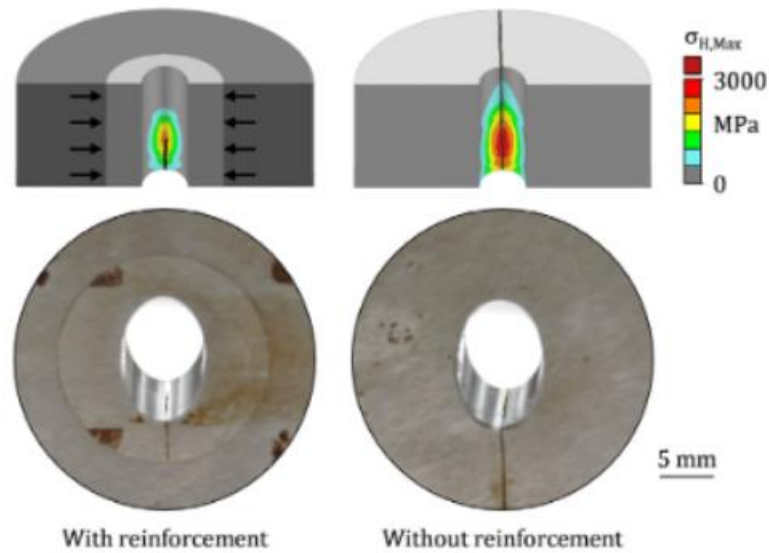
Fatigue Cracks in Tested Dies
